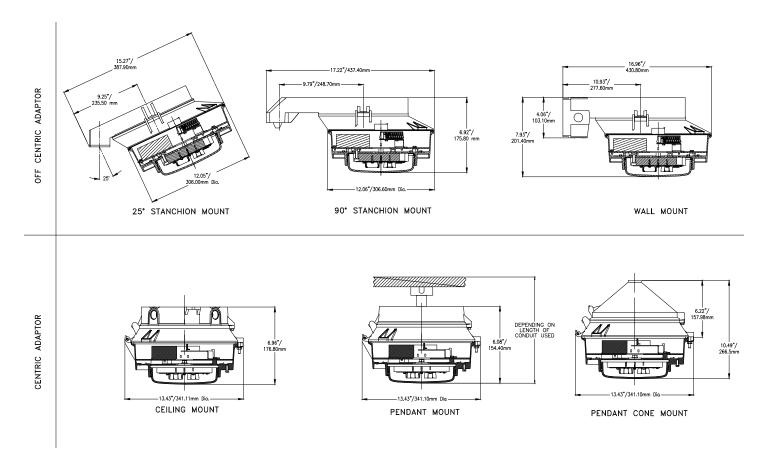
DIMENSIONS FOR ADAPTOR HOODS WITH THEIR RESPECTIVE CROUSE-HINDS MOUNTING HOODS
